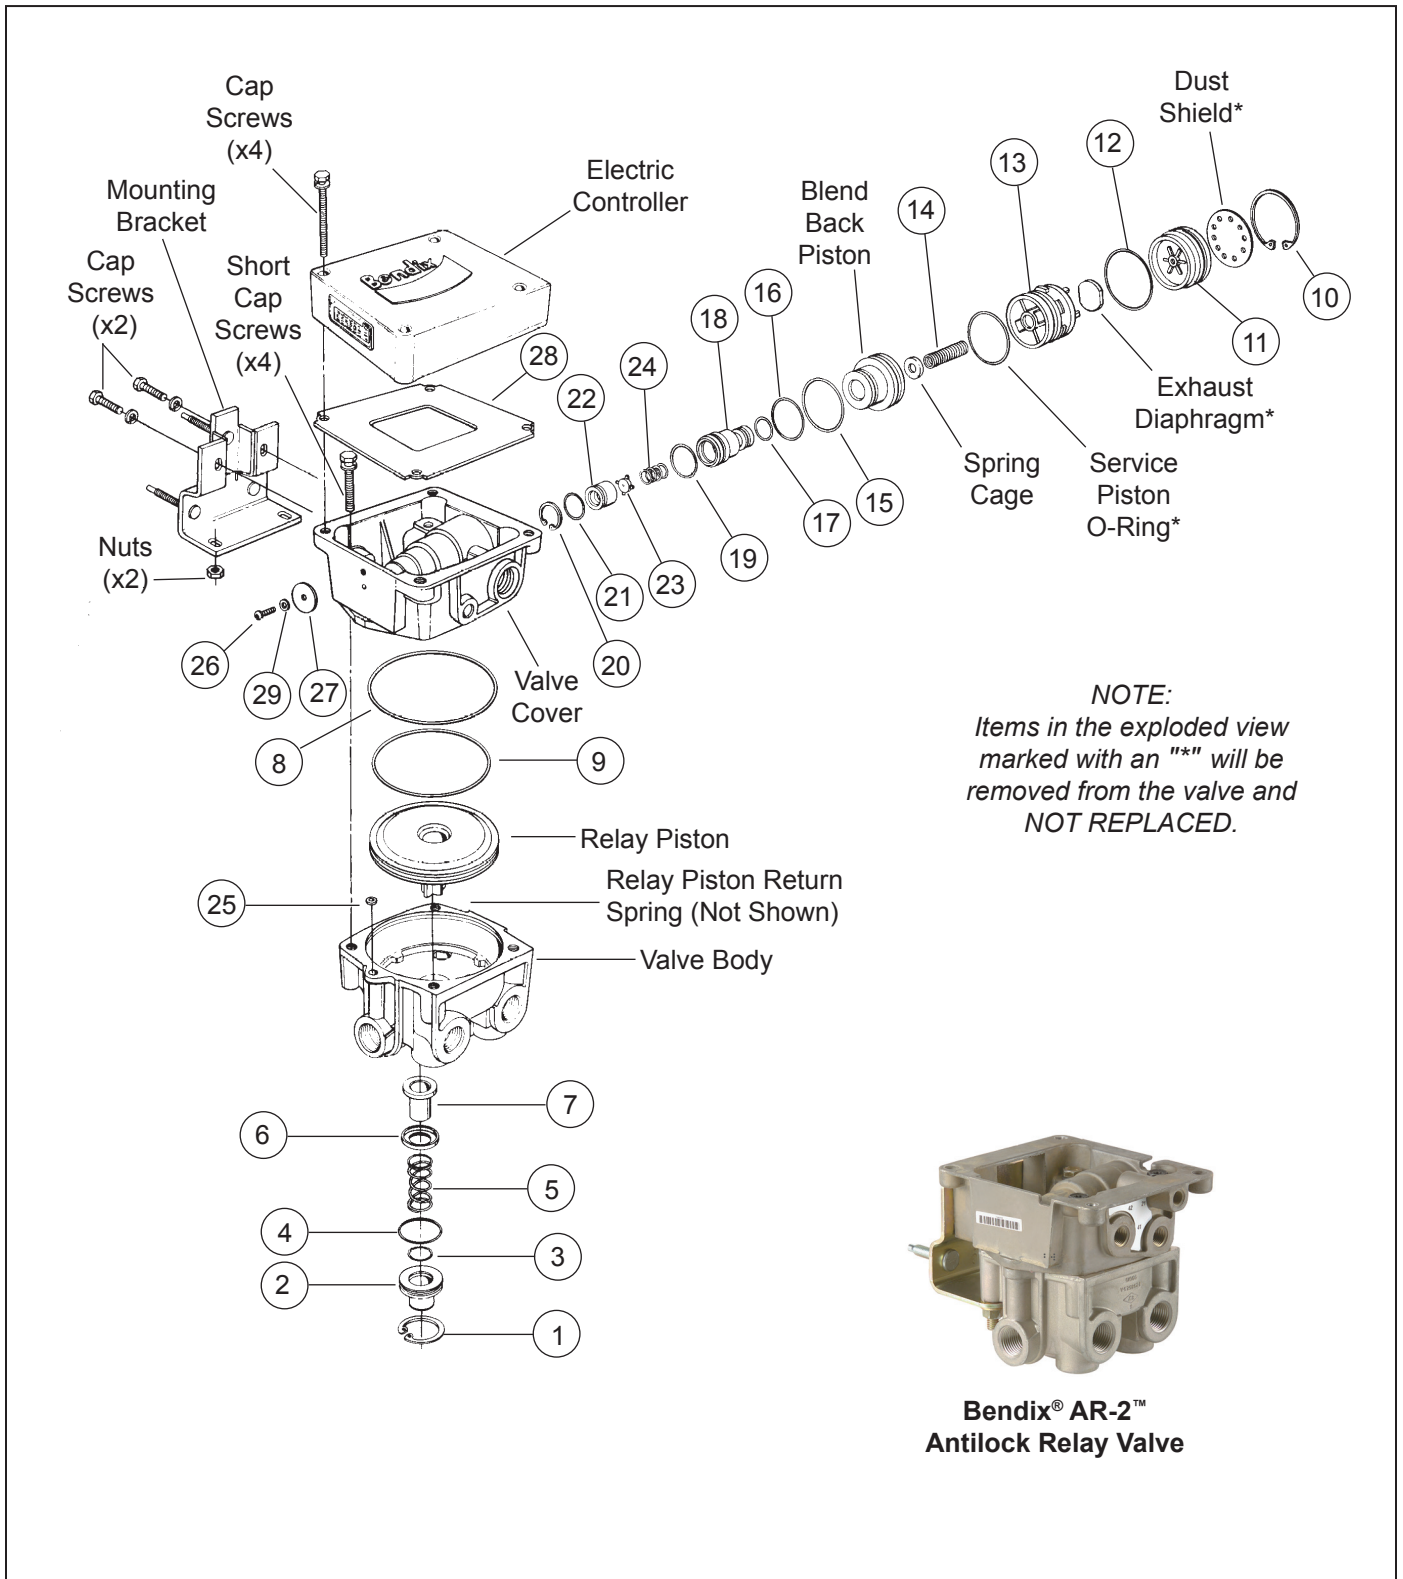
Bendix® AR-2™ Antilock Relay Valve
